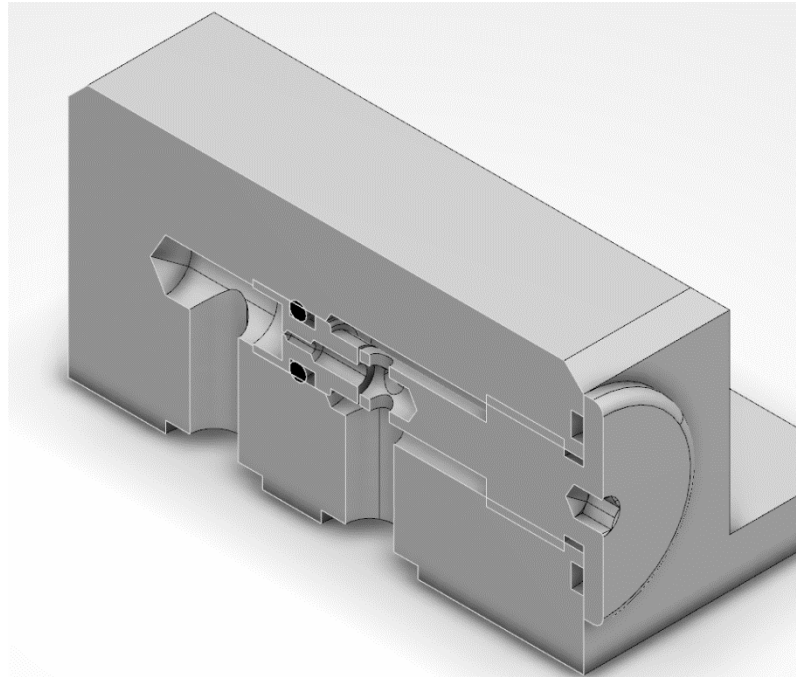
Cross sectional view from the CAD model of the test assembly
